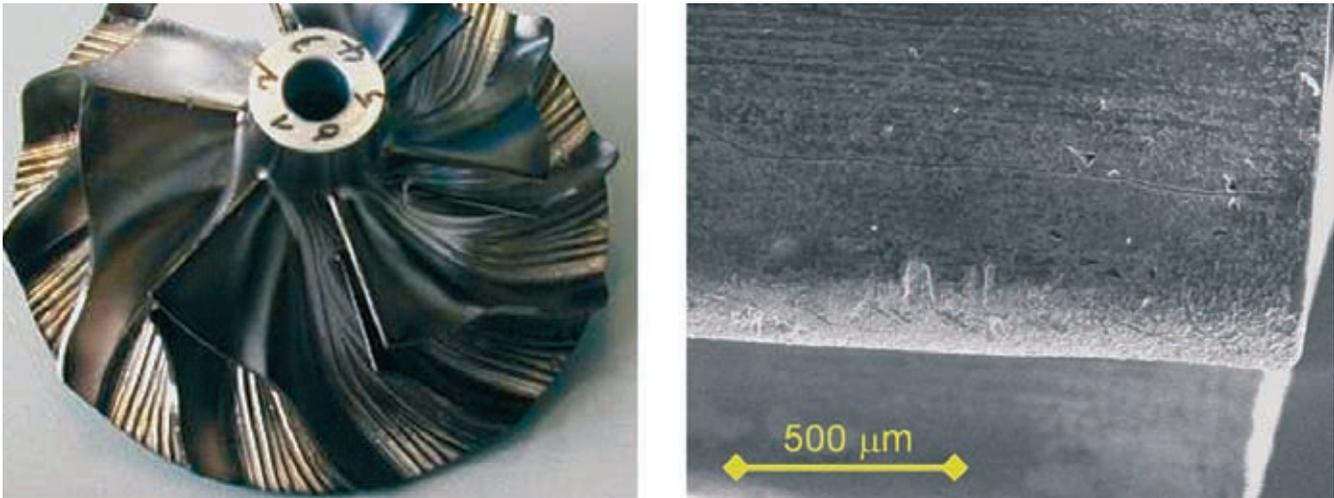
Milled compressor impeller after 300-hour engine run with low-pressure EGR
